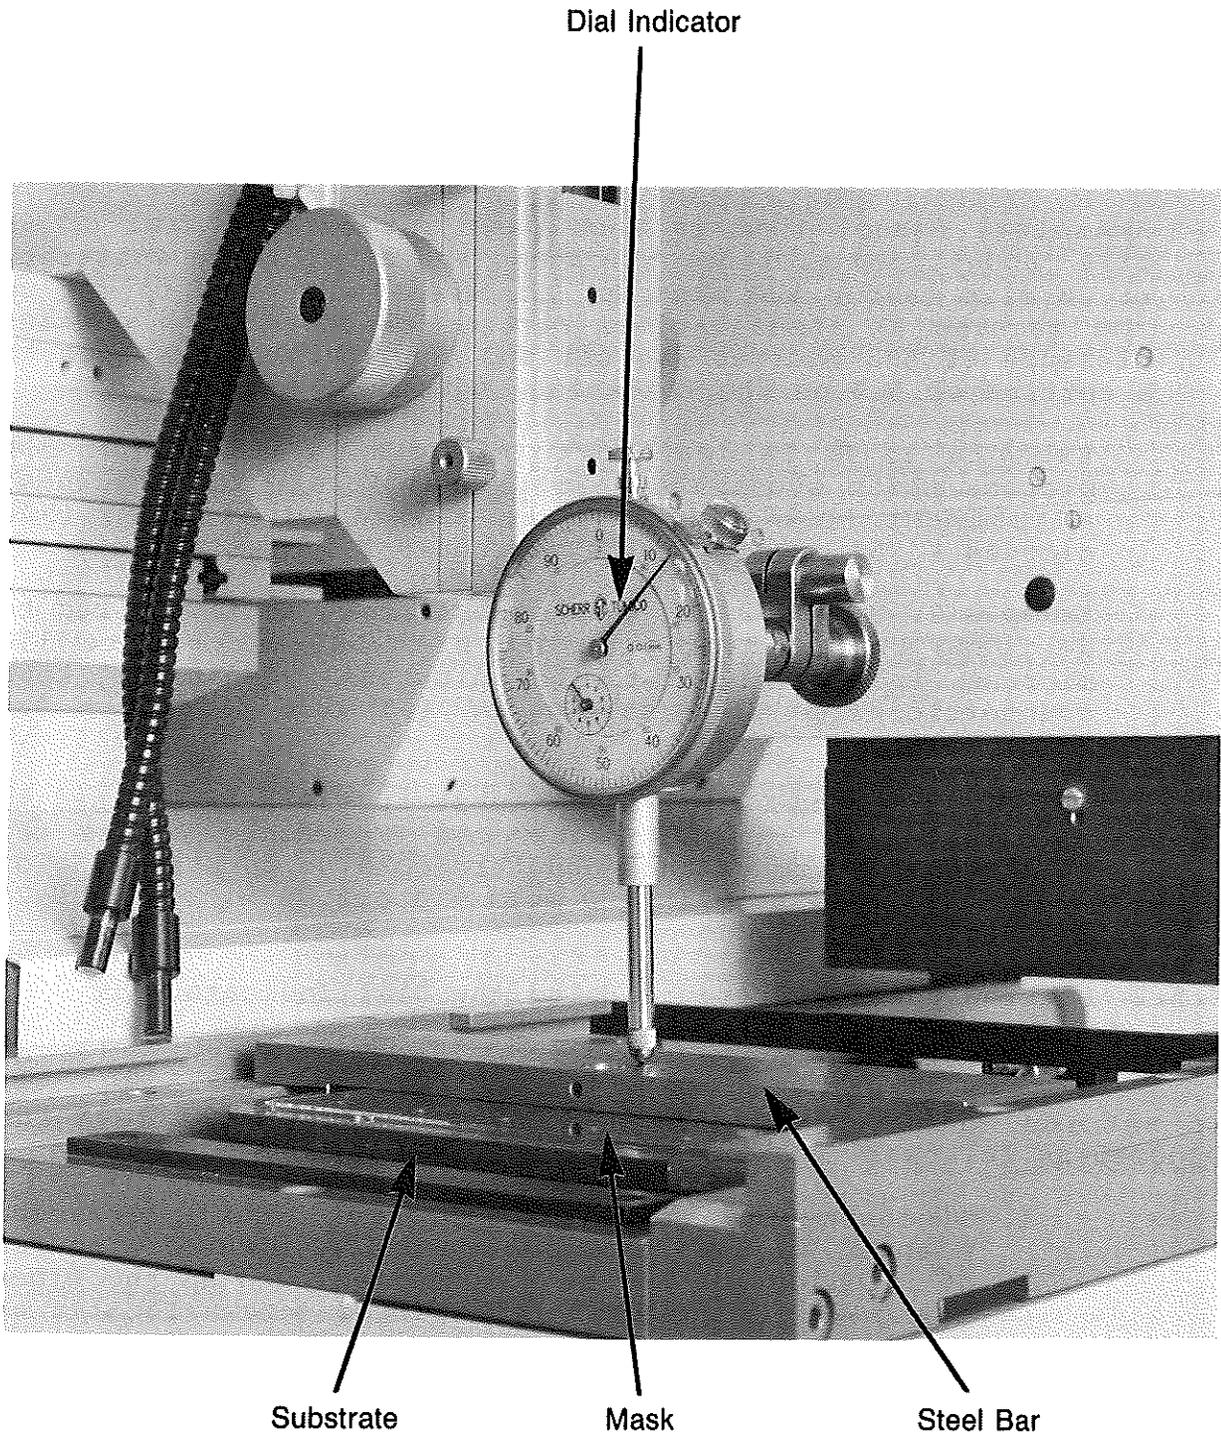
A Dial Indicator Assembled in Machine (U.S. Version)
